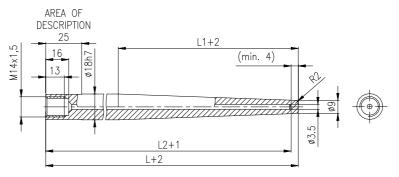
DIMENSIONAL DRAWING, TABLE OF DESIGNS AND WEIGHTS OF THERMOWELLS, SHAPE 4 PURSUANT TO DIN 43772, THREAD M18
